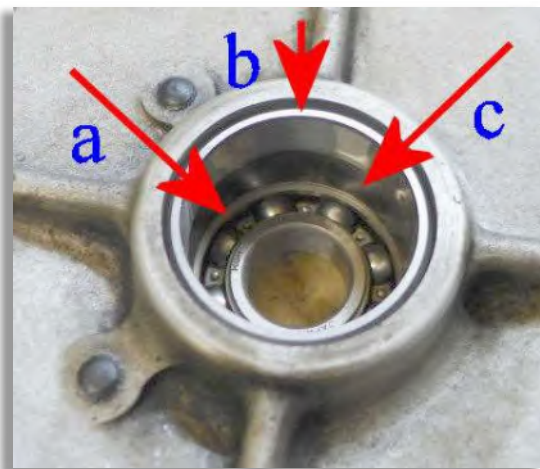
Details of the crankcase driving side. One can see a) the RLS8 ball bearing, b) the race of the LRJ1 roller bearing and c) a spacer sleeve, which separates both.
